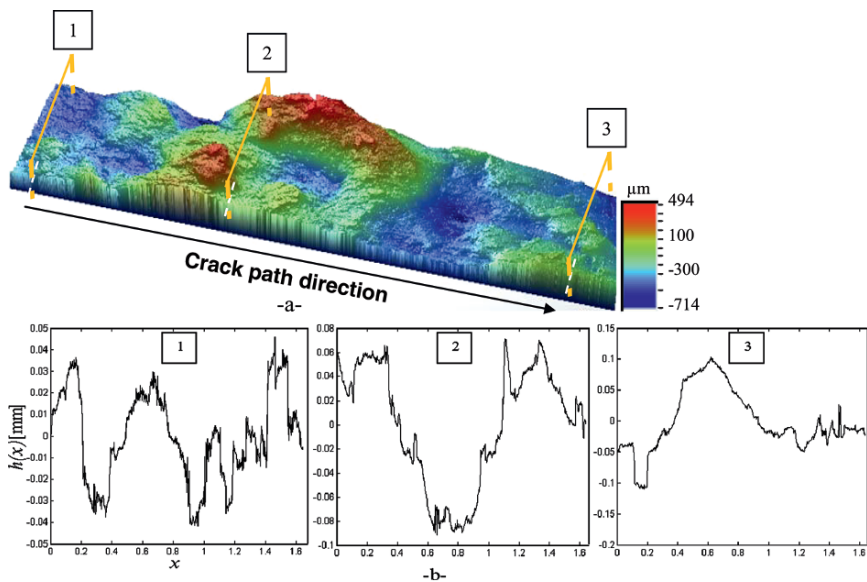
Examples of digitized fracture surface; (a) 3D roughness profile, (b) three different fracture profiles extracted at (1) crack initiation zone, (2) crack propagation one and (3) final rupture
